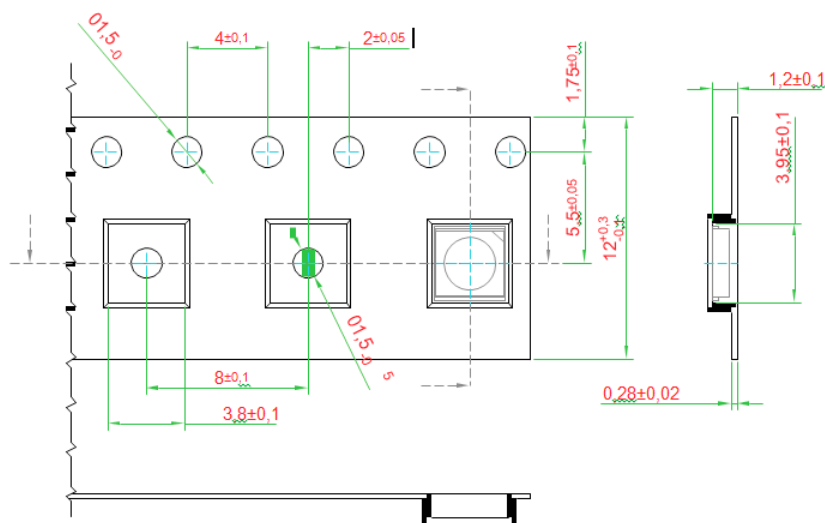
Pocket Tape dimensions for LUXEON 3535L Color Line.
